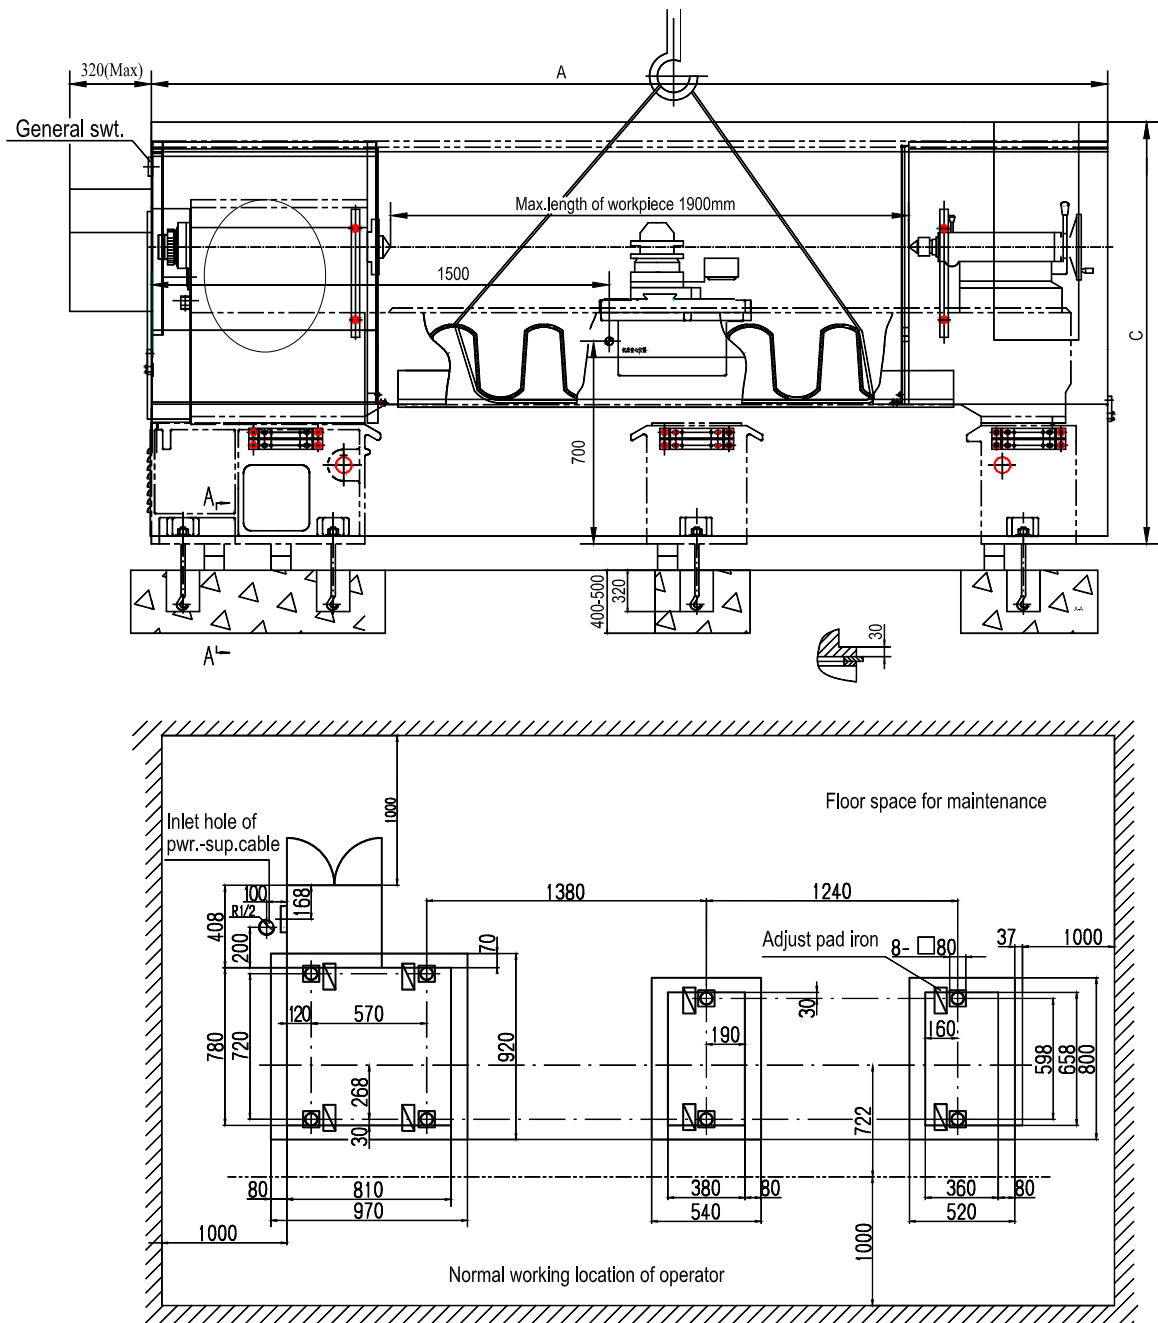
Handling plan and foundation schematic for machine of i,j series(max. length of workpiece: 1900)
